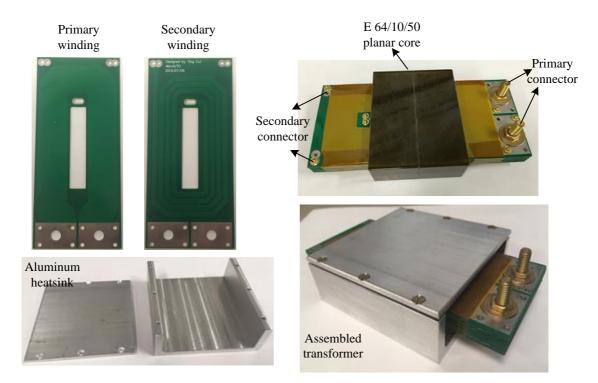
Photo of designed PCB winding and assembled transformer.
